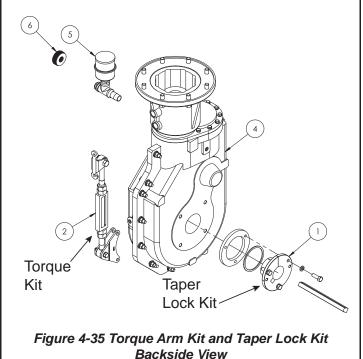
Torque Arm Kit and Taper Lock Kit Backside View
